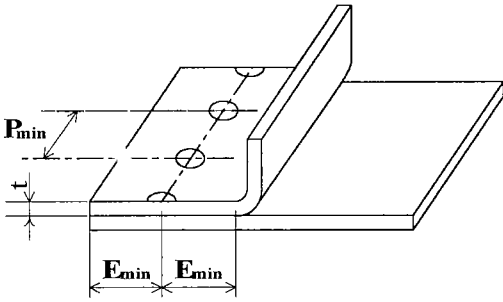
The minimum welding pitch and minimum edge interval
